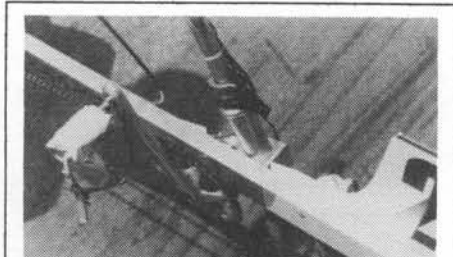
Aluminum head tube and bottom bracket (on centerline) are glued and bolted inside aluminum mounting blocks that are bolted to the offset 25x50-mm frame tube.
